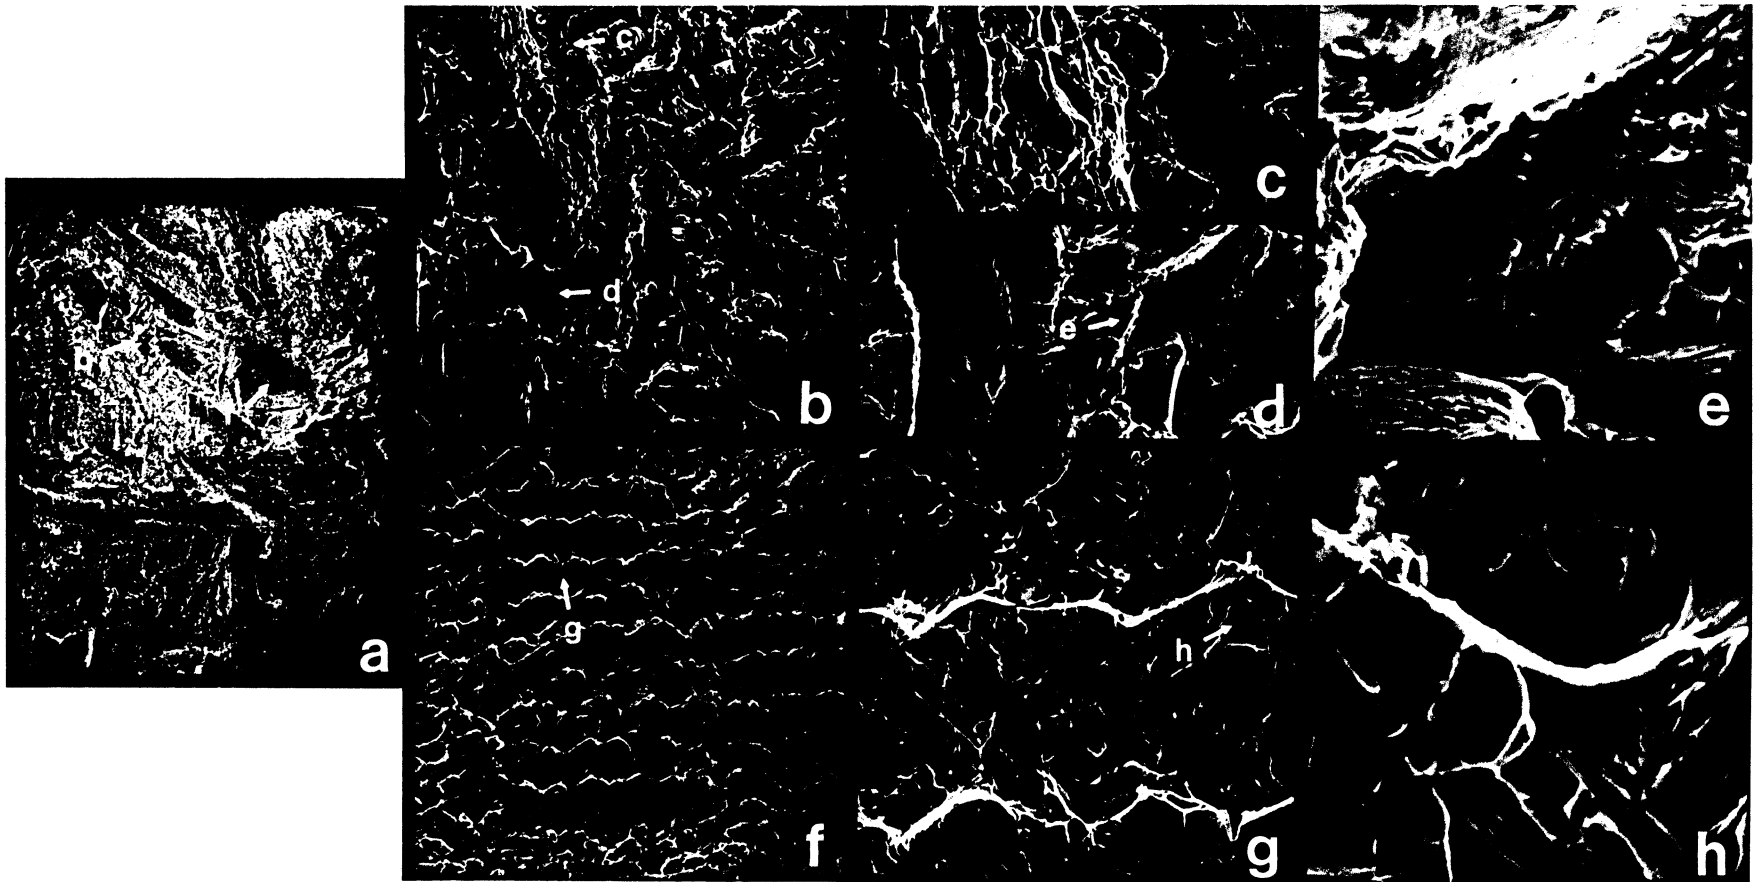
Details of As-cast -196°C Charpy Fracture Surface.
